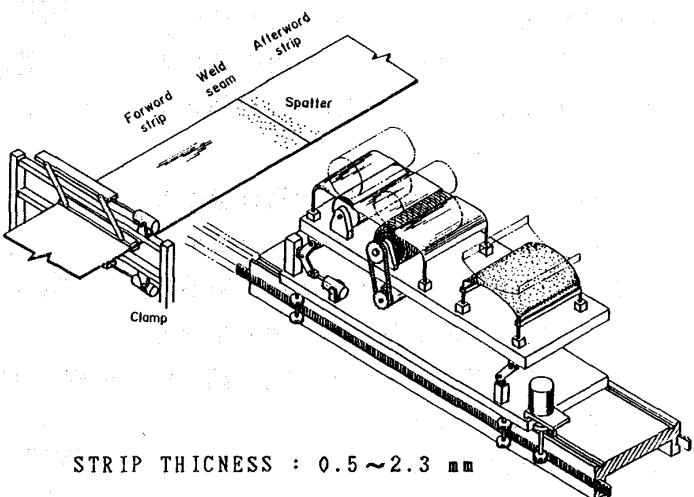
Schematic Diagram of the Weld Spatter Brushing Machine
